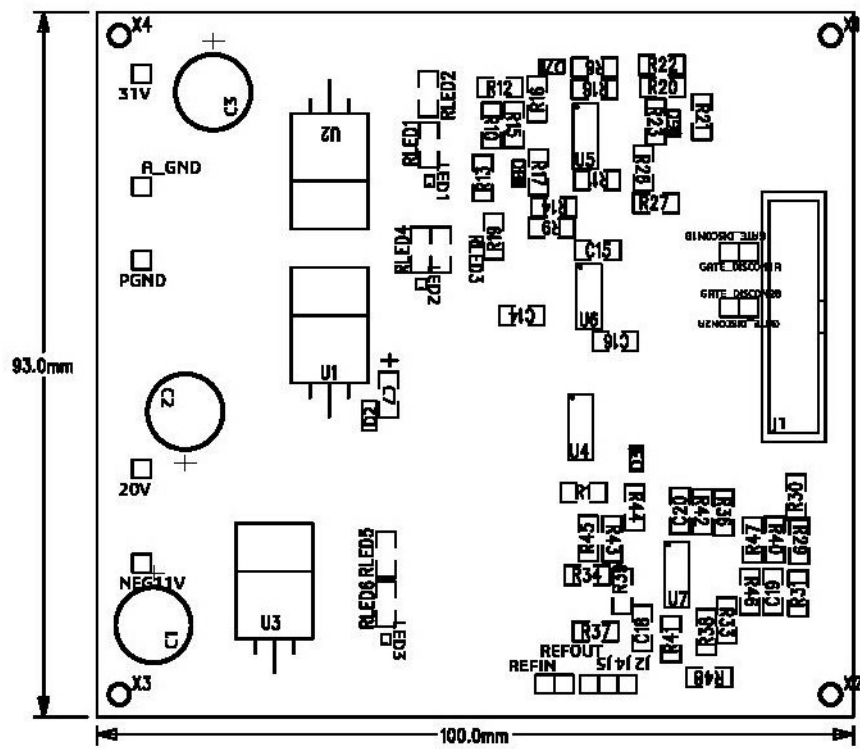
Miniature MOSFET Gate Control Board Assembly diagram Top. PCB size 95 mm x 100 mm
